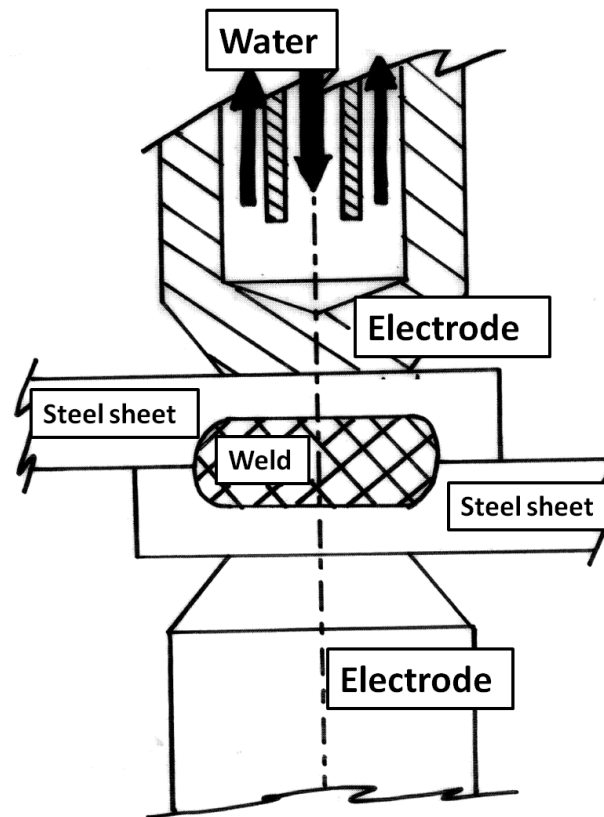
Basic set up of the resistance spot welding process; two sheets of similar material and thickness between two water cooled electrodes. The weld is formed in the centre between the two electrodes.
